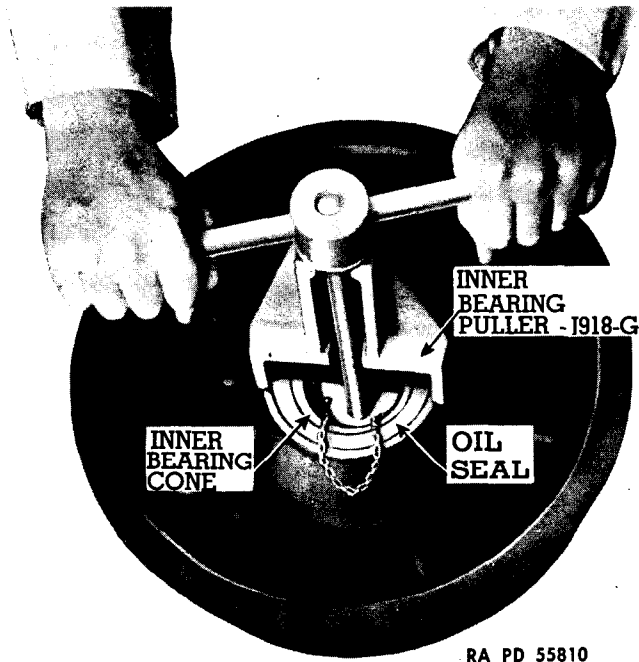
Removing Wheel Inner Bearing and Oil Seal
